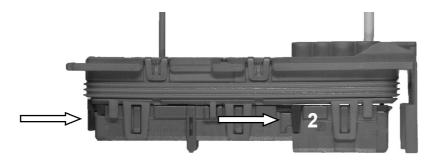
46-way contact housing, closing of secondary locking mechanism
